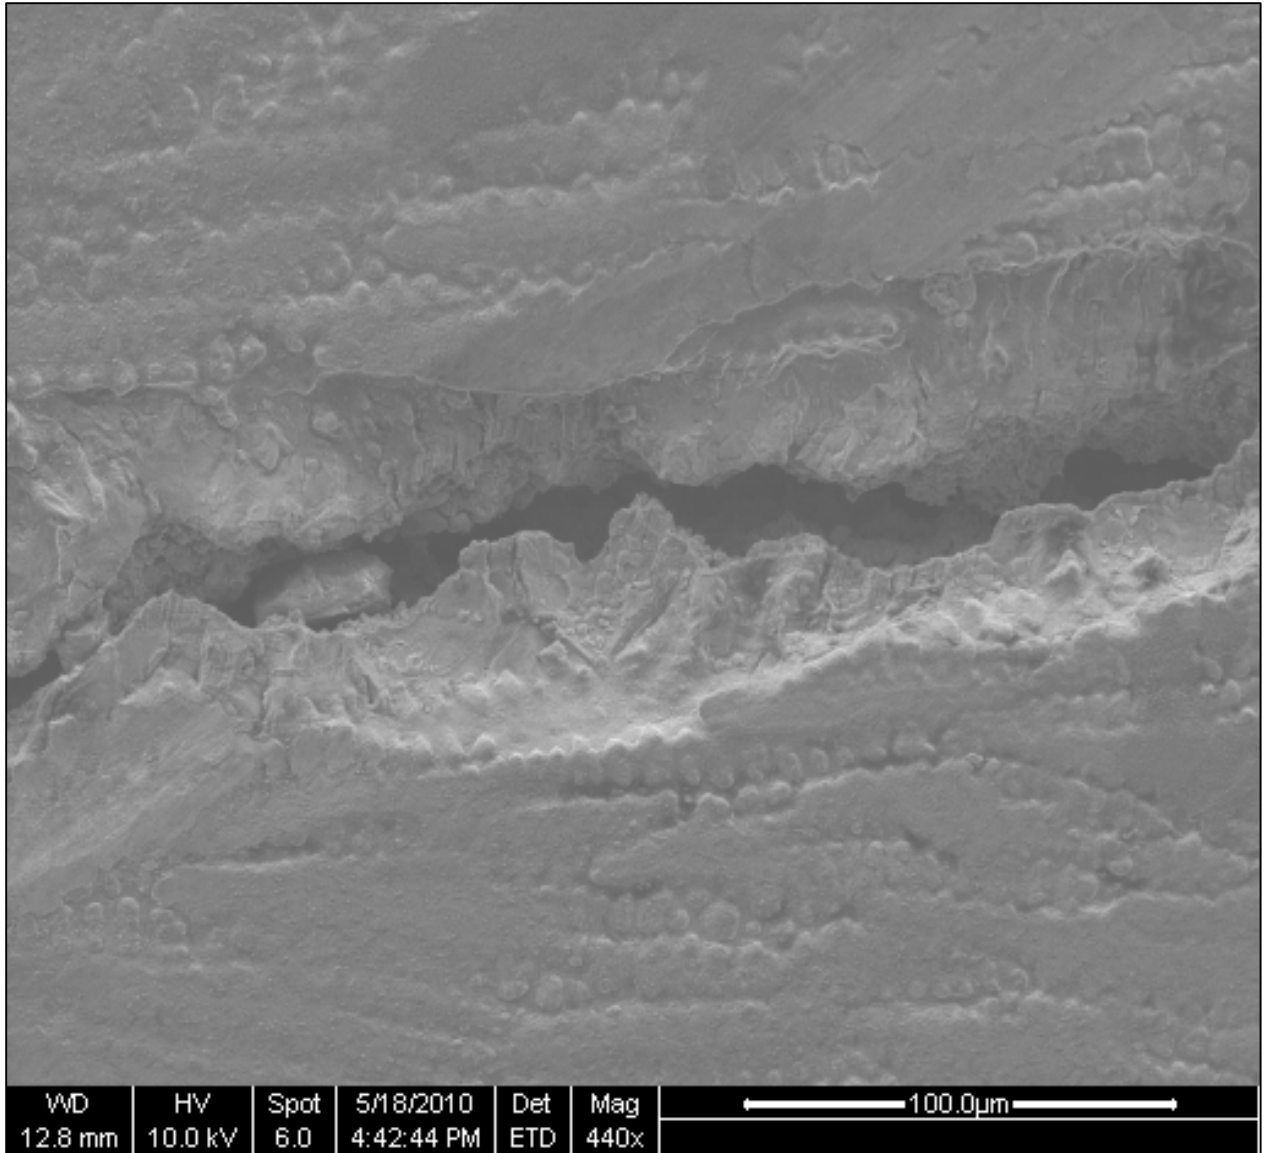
A solidification crack in the weld pool. Dendrites are visible along the surface of the weld pool, as well as within the crack.
